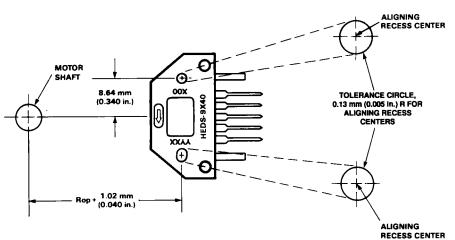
HEDS-9X40 Mounting Tolerance.
